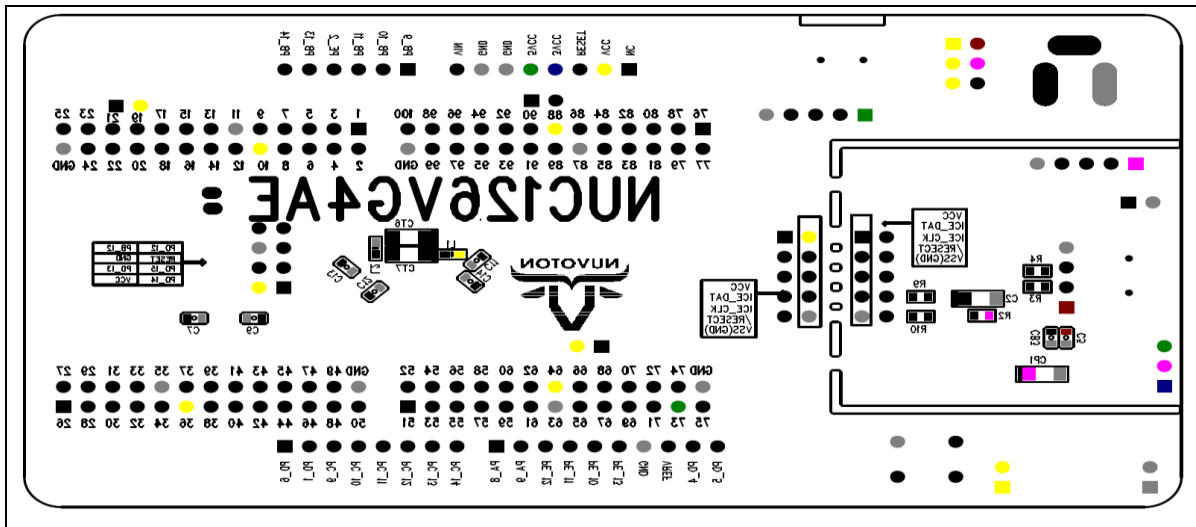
NuMaker-PFM-NUC126 Mother Board Placement - Back View
